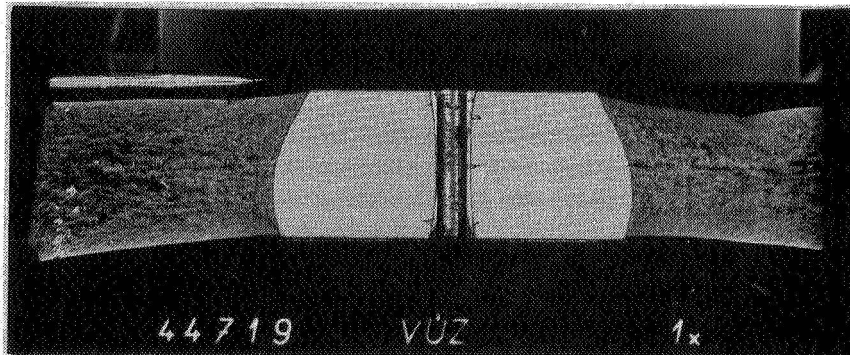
Fracture surface of a base metal, variable amplitude loading CCT specimen.
